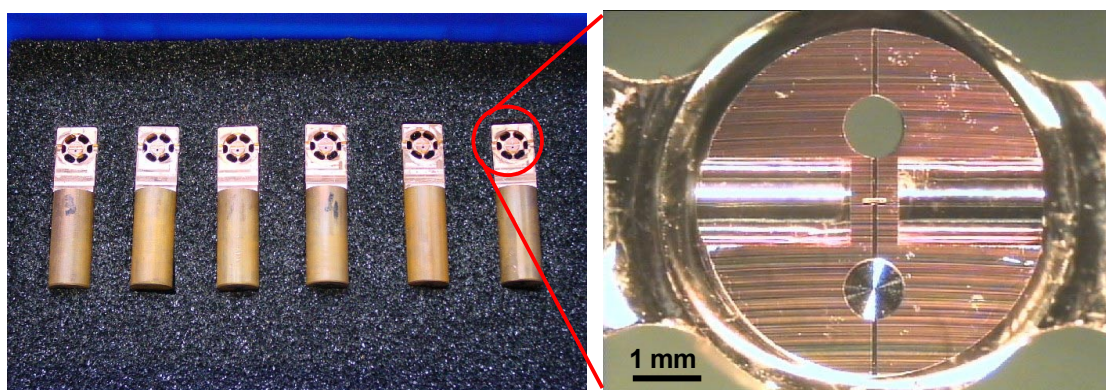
Left: First production run of six mixer backpieces (before removing them from their mounting structure). Right: Enlarged view of a single backpiece.
